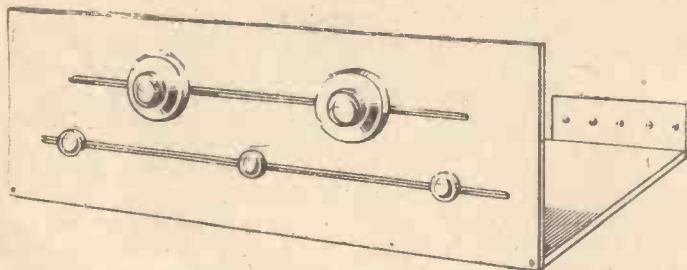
Suggested Type of Hook-up Panel and Board.
